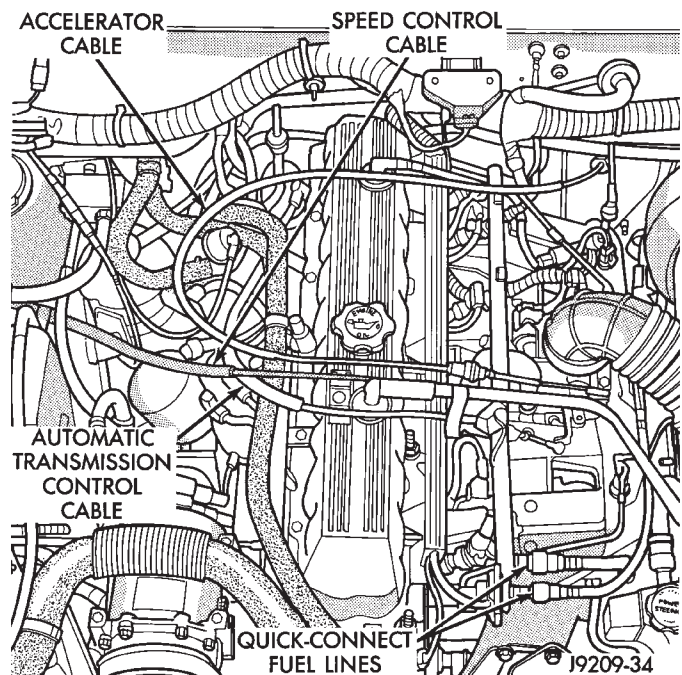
Accelerator Cable, Speed Control Cable, Automatic Transmission Control Cable & Quick-Connect Fuel Lines
